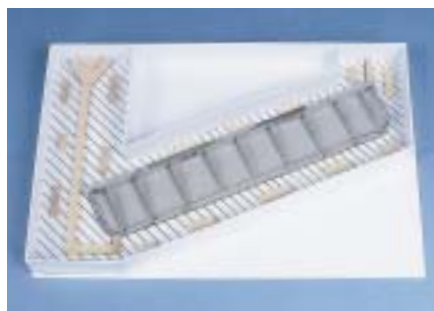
BUILDING THE MOLD BOX. Tom next built the sides. The mold is angled so the gates (basswood strips) channel the resin into the cavity from the bottom, driving out the air. The short wood strips along the edges will form cavities for alignment lugs.
